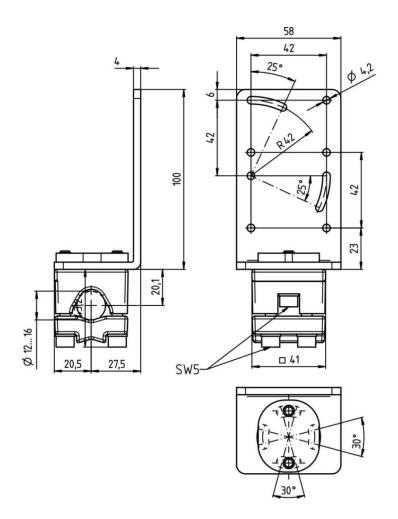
Dimension drawing BE 901 FA-003 mounting device (all dimensions in mm)
